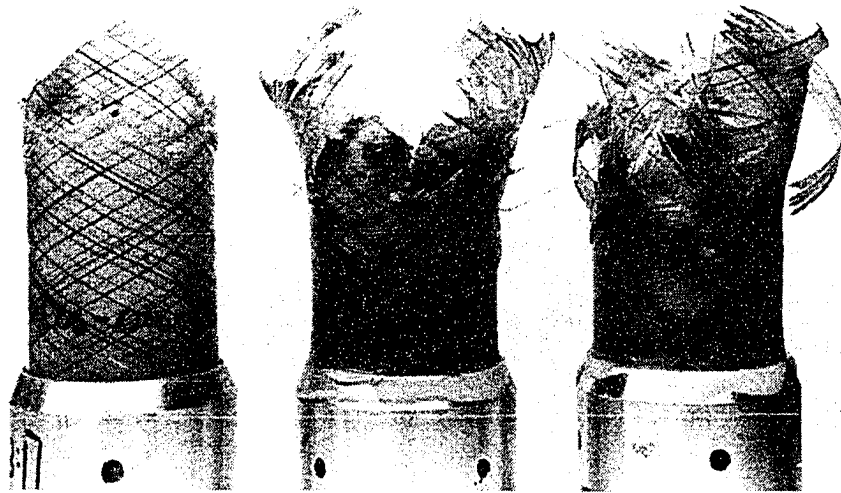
Failures mode under [3H:1A] loading: Burst failure showing jagged fracture surfaces (Mertiny et al., 2004a).
